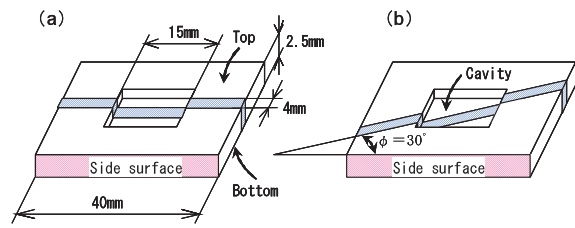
Bending samples cut from IC ceramic plates. (a) Sample cut out parallel to side surface. (b) Sample cut out 30° (ϕ) off same side surface.
